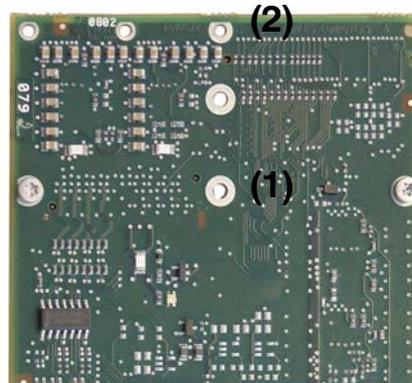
Additional Anchorage Point on a XMC-ETH2 (RC) Board
